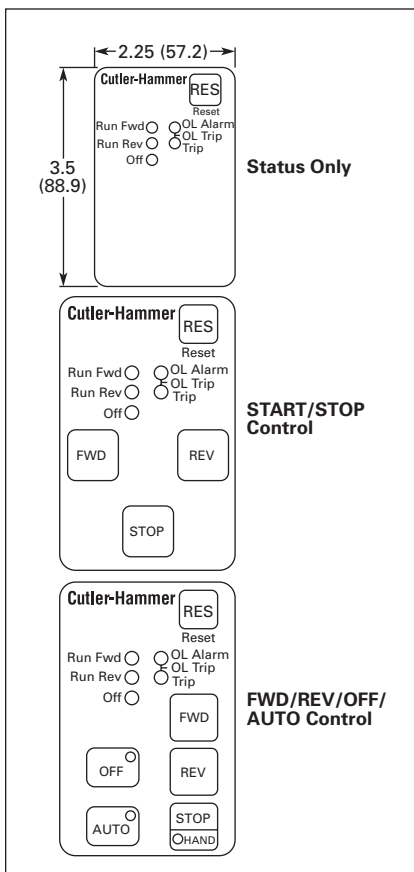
Reversing and 2-Speed Pushbutton Module
